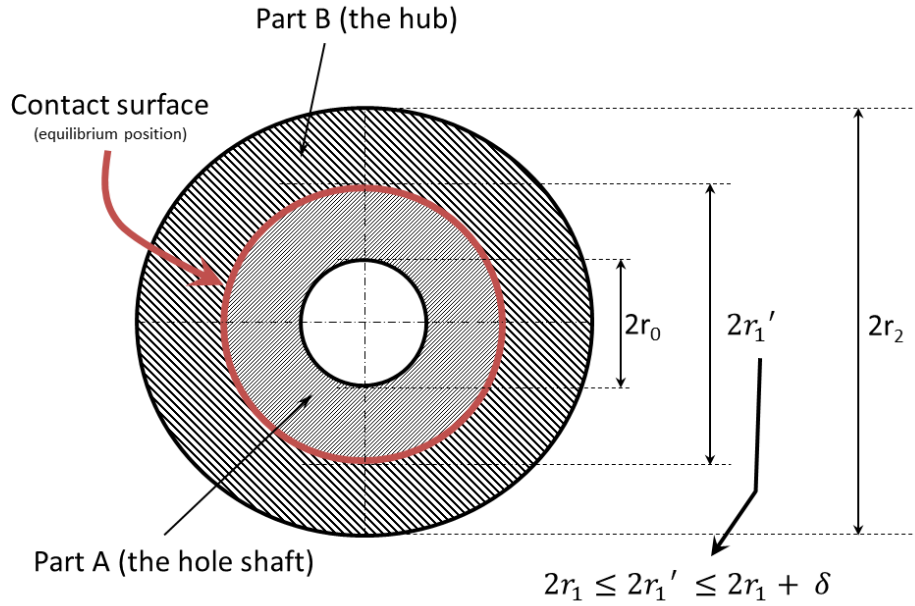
Two thick cylindrical parts to be assembled by shrinking fit
